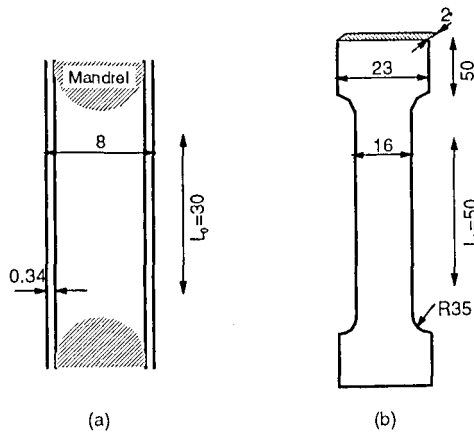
Sketch of the specimens used for tensile testing of (a) AA3103 tubes, and (b) AA6082 bars. The dimensions are given in mm.
